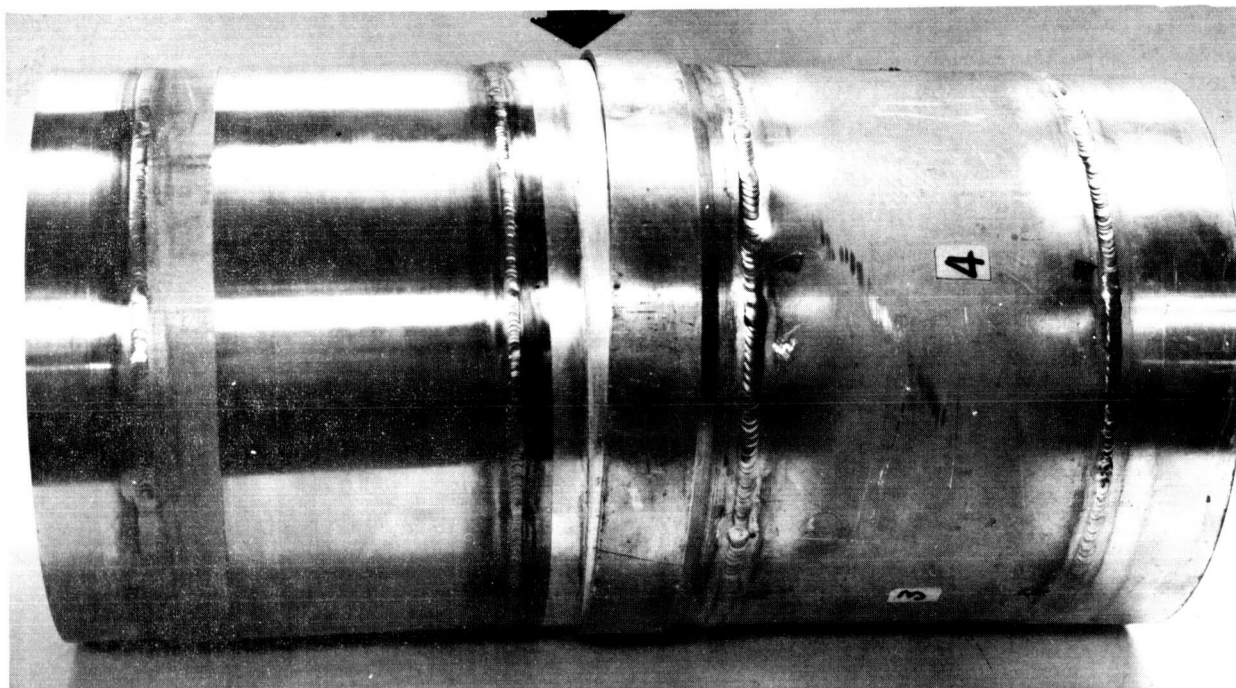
PHOTOGRAPH OF EIGHT-INCH DIAMETER WELDED
